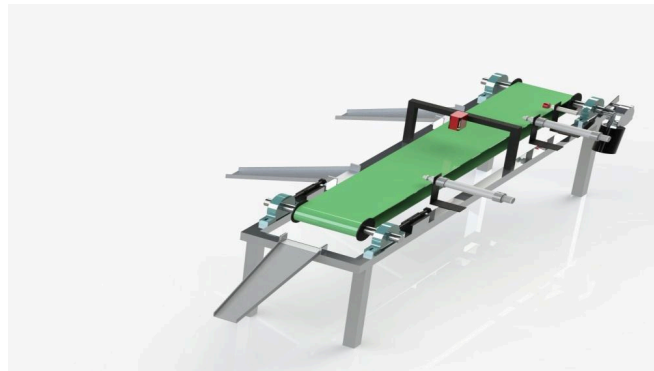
3D view of Pneumatic conveyor sorting system with machine vision.
